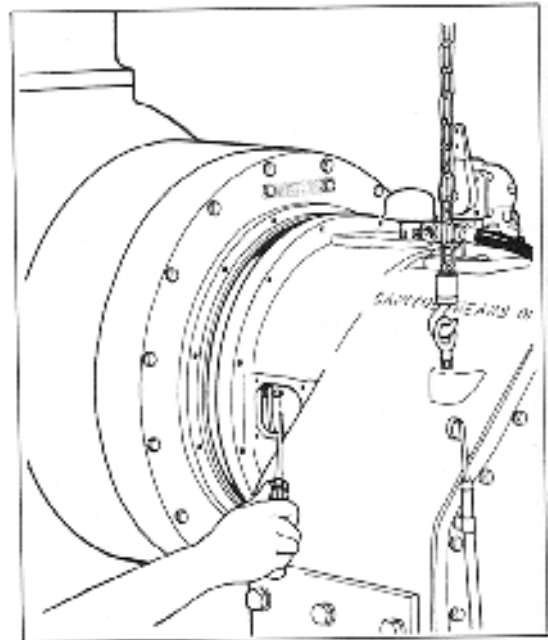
Maintaining clutch in forward driving drum while removing housing.
